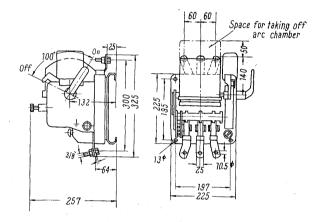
Outline drawing of AC breaker, type RF 921-200
